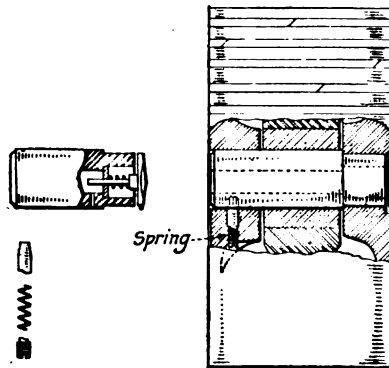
Piston pin oiling. (Fairbanks Morse Co.)
